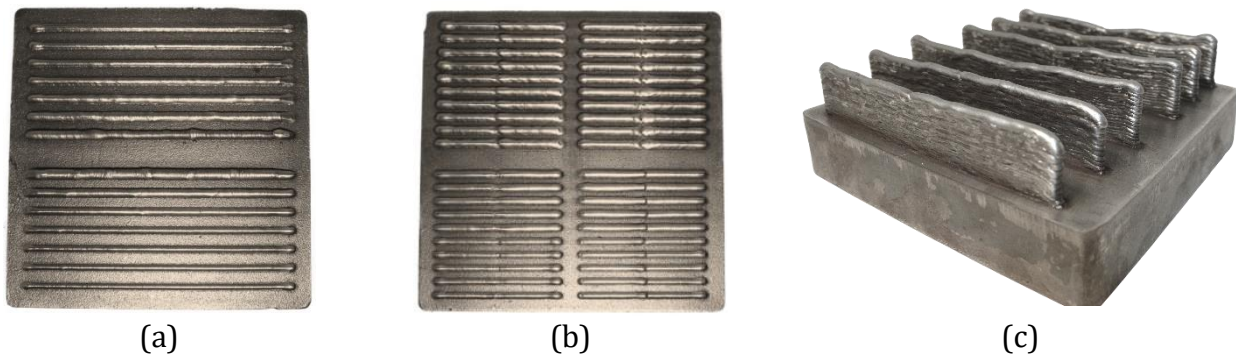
(a) Process parameters test; (b) weld beads joining test; (c) walls fabricated with different strategies
